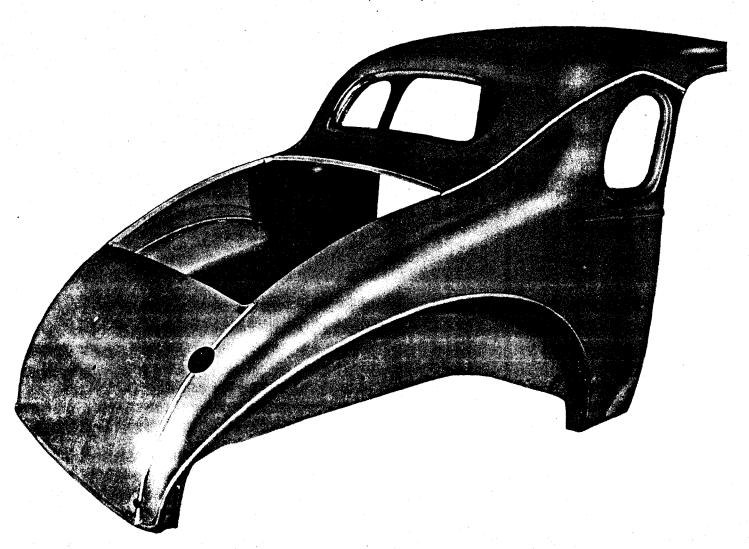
Illustration No. 29 Welding Lines of a Chevrolet Coupe.
